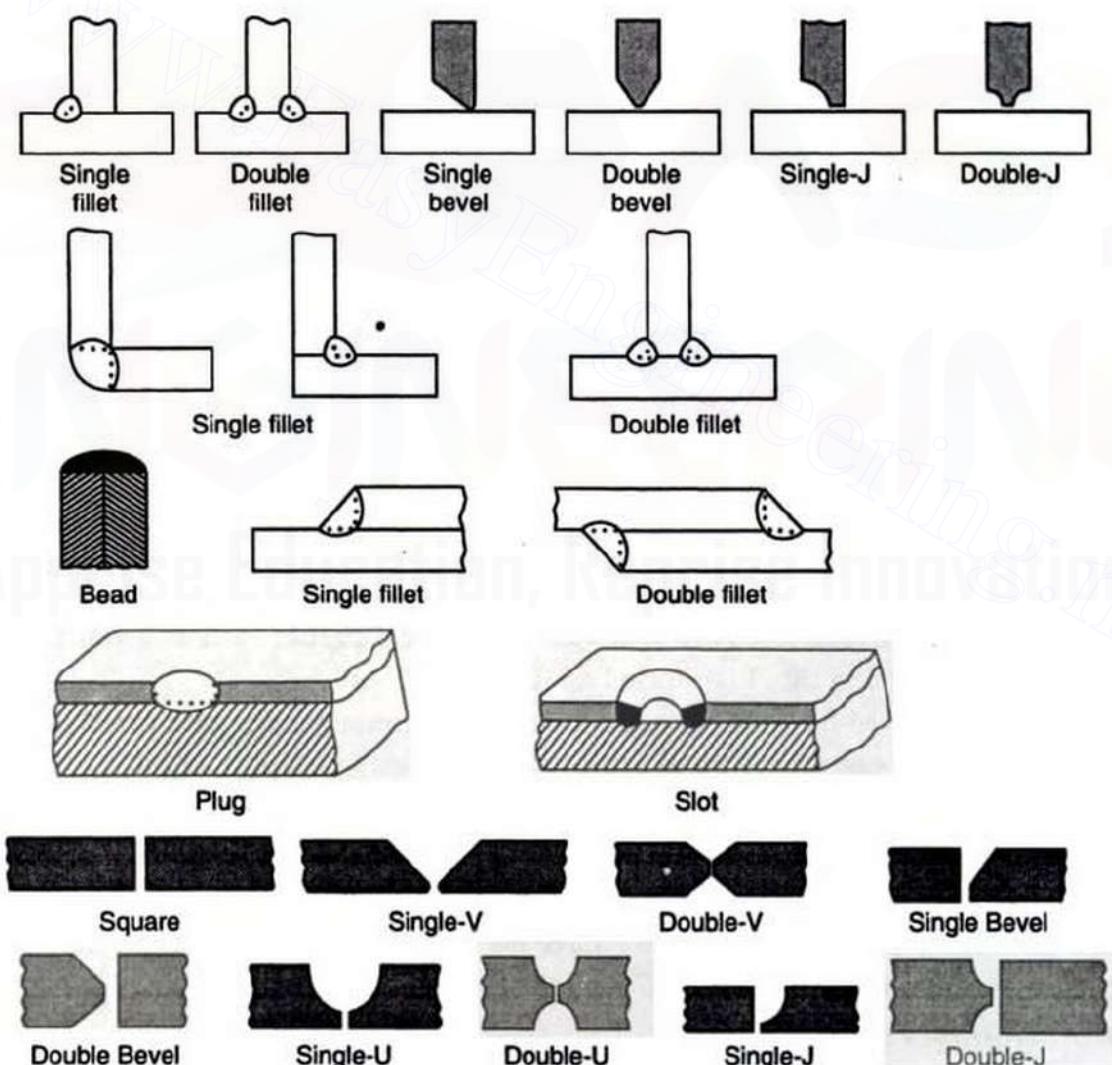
Types of joints and types of applicable welds.
